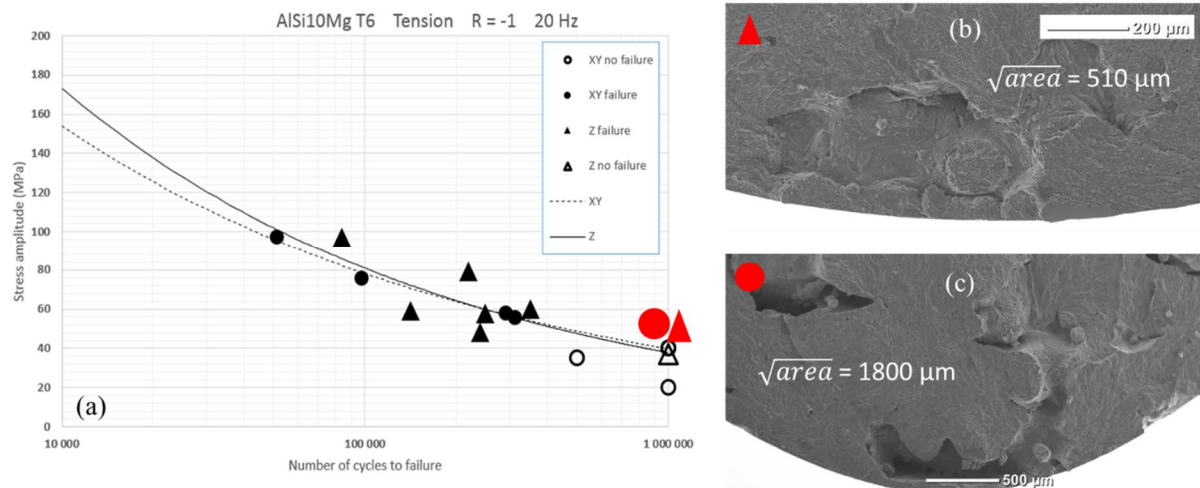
Step by step fatigue test on samples previously observed by μ -CT (a) Fatigue test results (b) Fracture surface for sample Z1 (c) Fracture surface for sample XY16.
